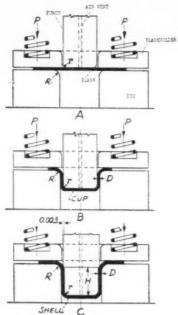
Illustrating the fundamental principles governing the drawing of shells from sheet metal blanks.
